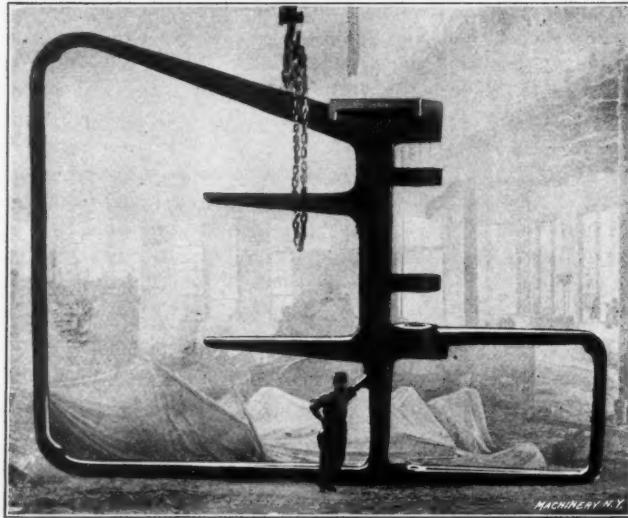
Steel Casting for the Rudder Frame of a Large Naval Vessel
